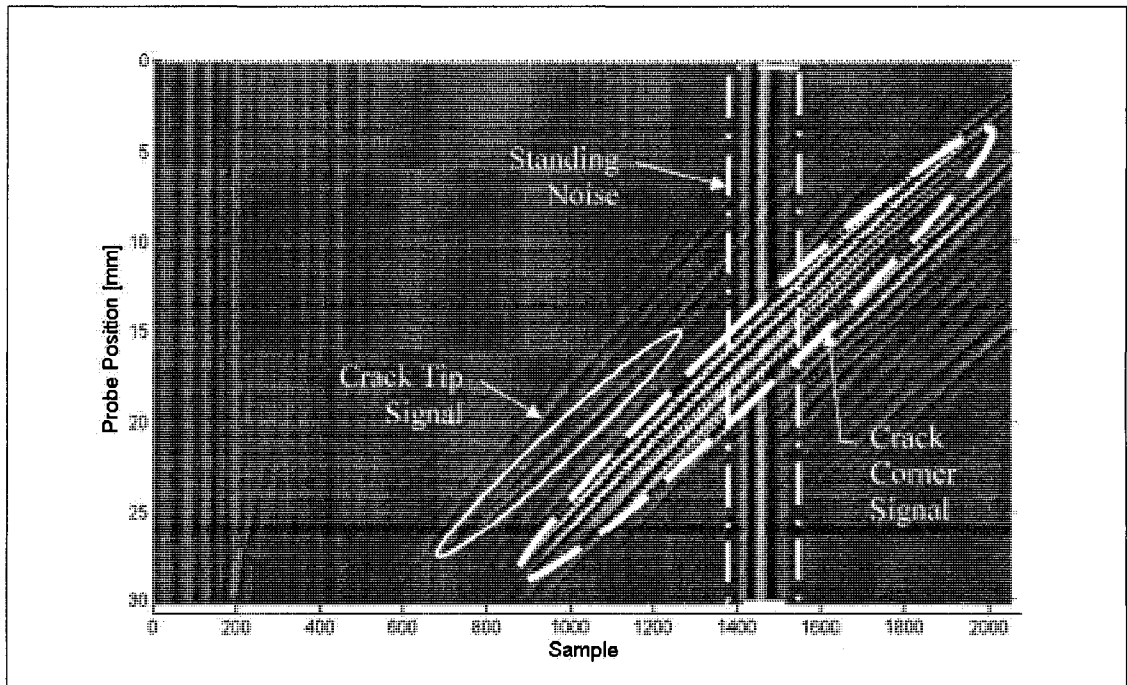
B-scans of specimen CO1 at 75% crack opening load
